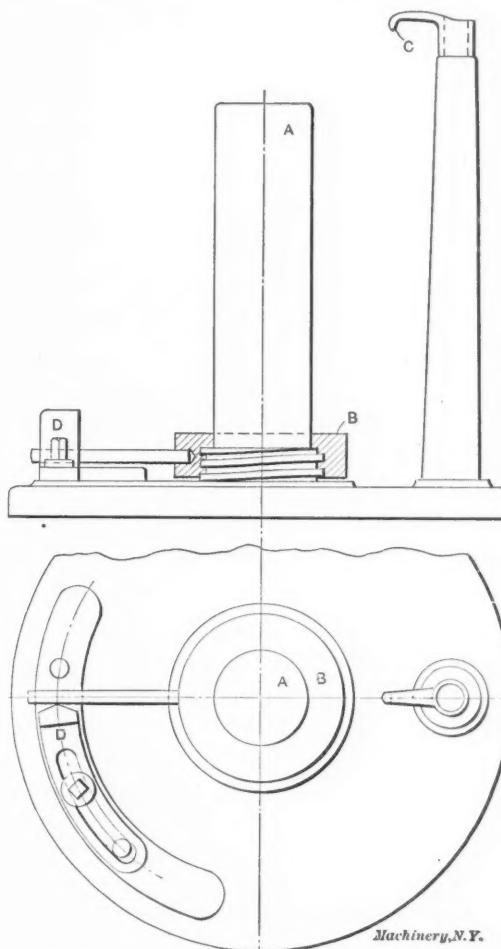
The Fixture used for Facing Operations on Work in Fig. 2.
